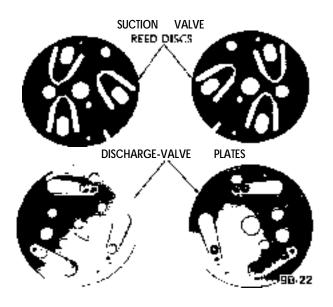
B-25 • Compressor Suction Valve Reed Discs and Discharge Valve Plates
